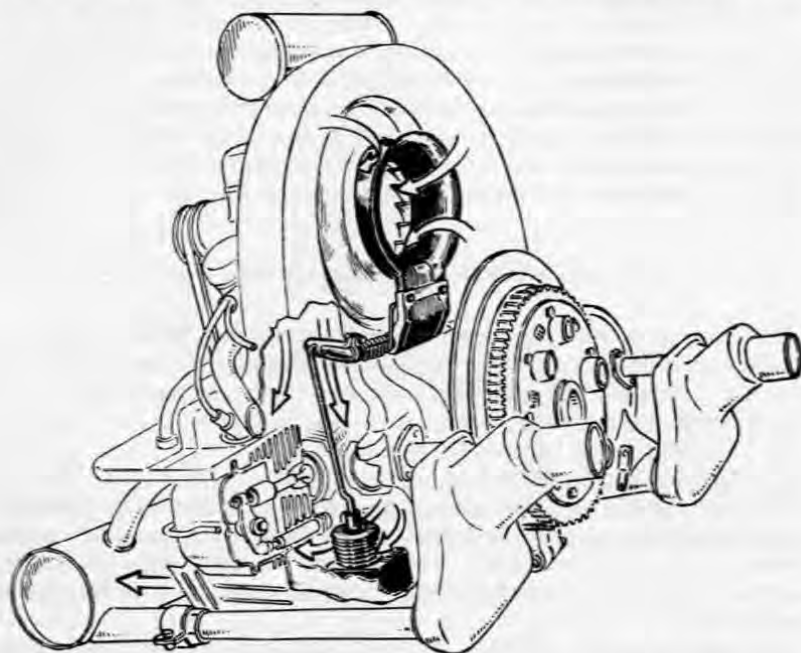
Cooling control in the VW engine by throttling the air inlet. Automatic control is provided by a thermostat.
